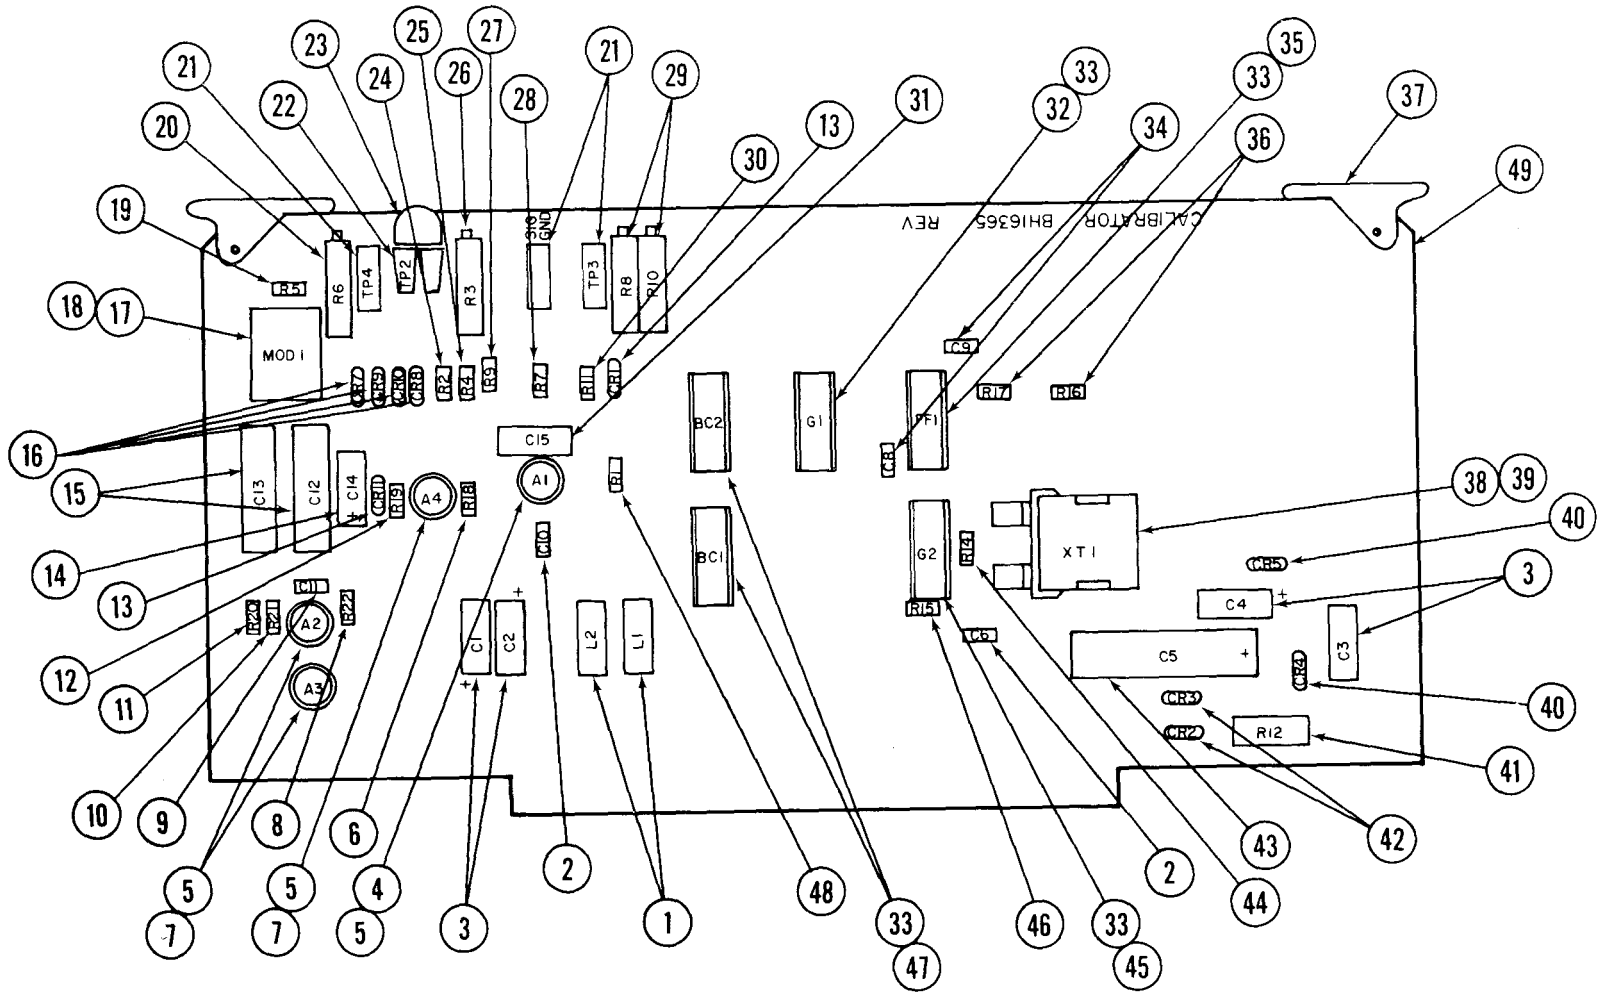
BH16365-1 Calibrator Circuit Board Assembly.
